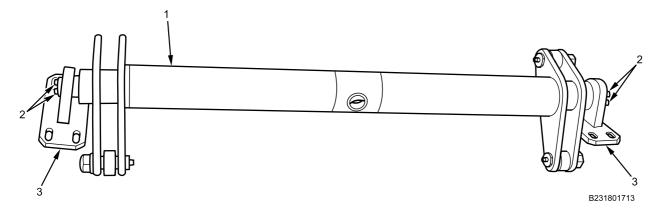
Rear Door Lock Assembly Removed from Vehicle.
